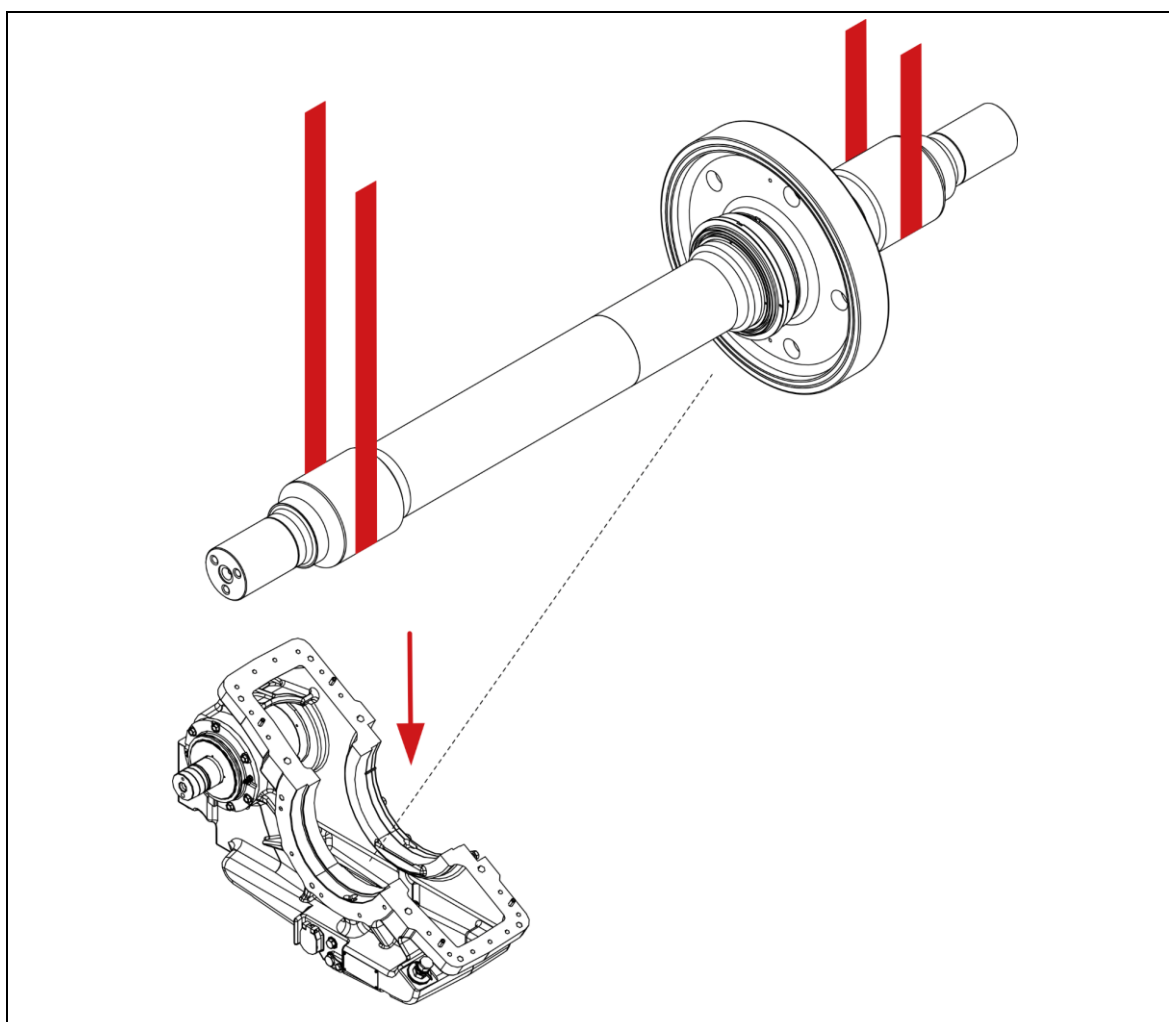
Lifting the pre-assembled wheelset shaft into the gearbox housing
